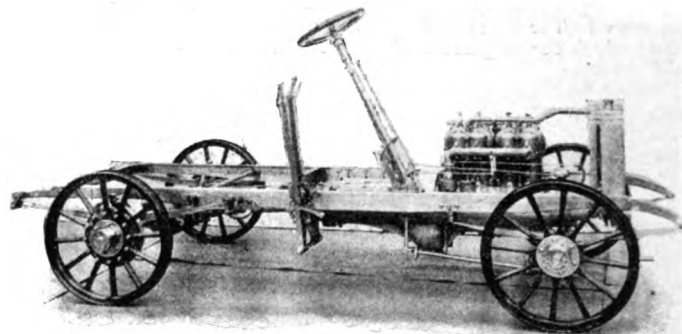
Chassis of 12-h.p. Decauville Car.
